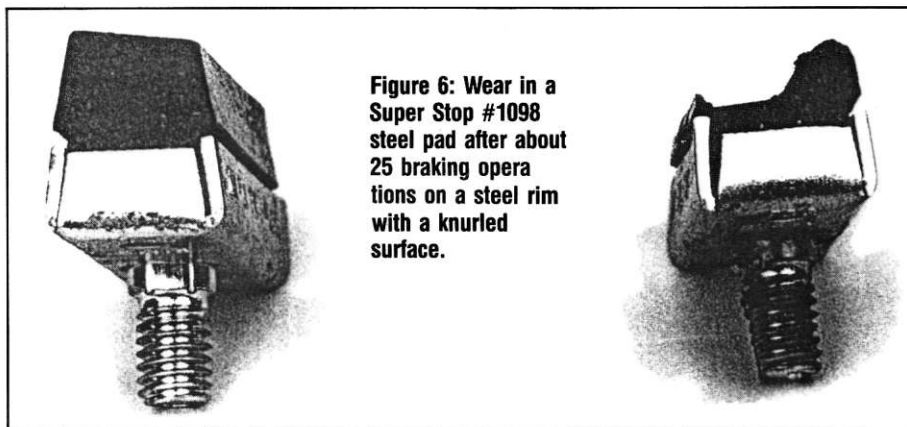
Wear in a Super Stop #1098 steel pad after about 25 braking operations on a steel rim with a knurled surface.
